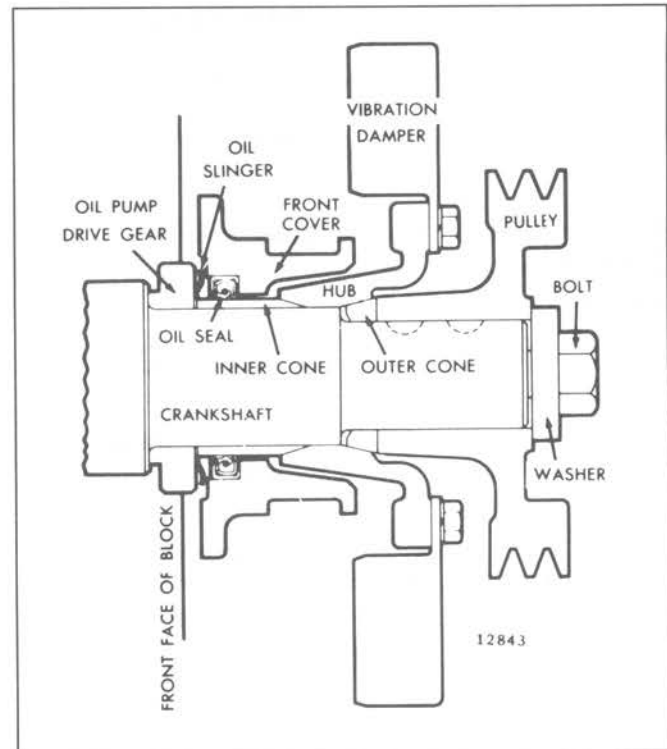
Vibration Damper and Crankshaft Pulley Assembly Mounting
